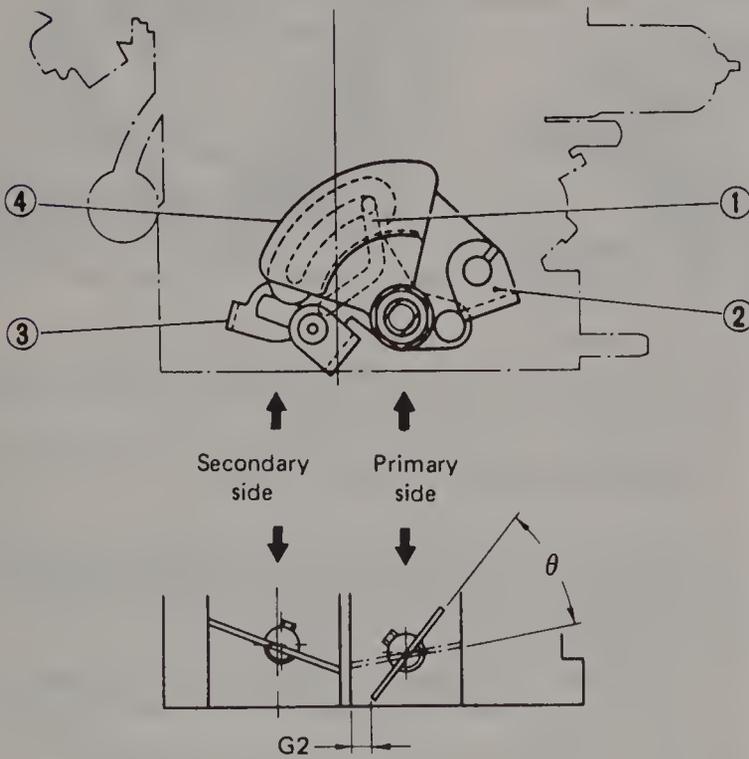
Secondary throttle valve adjustment (UK Hitachi) (Sec 11)
